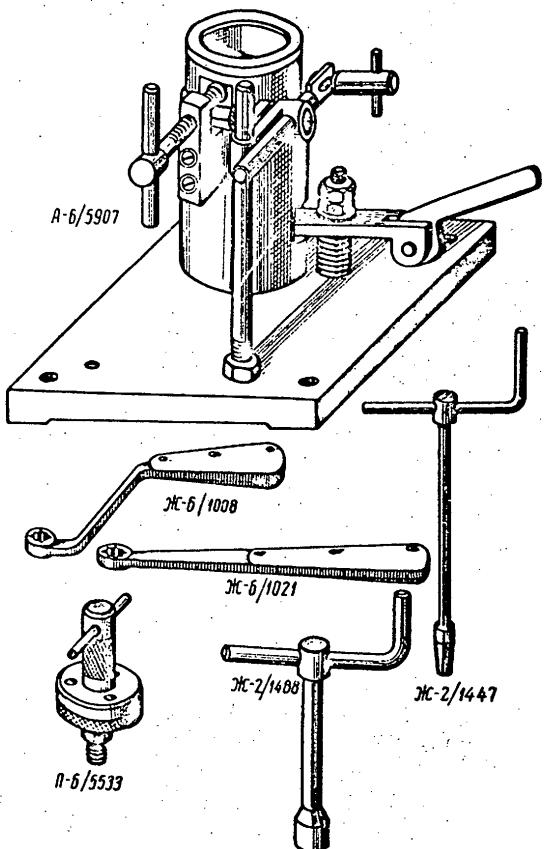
TOOLS AND FIXTURES FOR SUPERCHARGER ASSEMBLY
